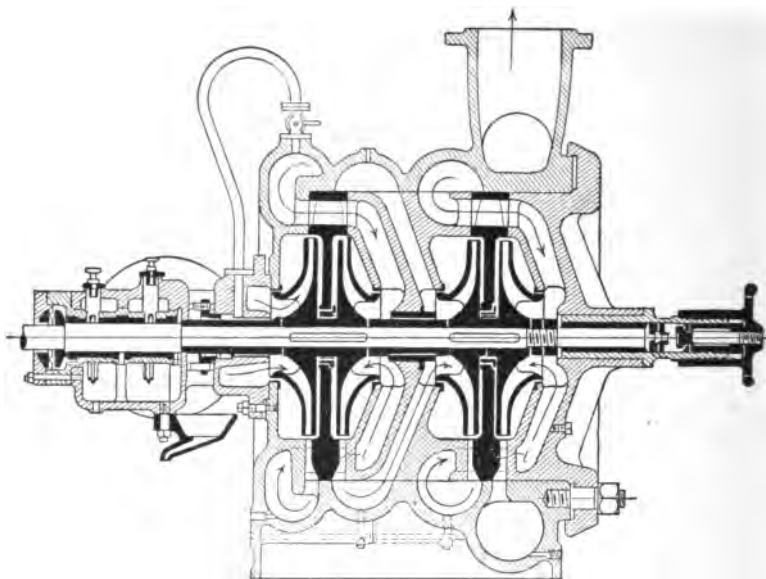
Risdon-Sulzer four-stage pump with balanced impellers.
